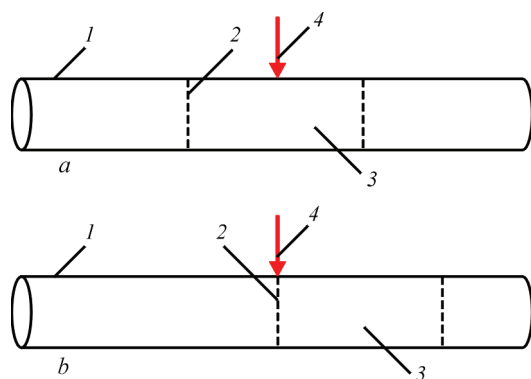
Schematic of two types of samples for conducting a dilatometric study: *a* — welded metal in the sample center (type I); *b* — fusion zone in the sample center (type II); 1 — cylindrical metal sample; 2 — fusion line; 3 — welded joint zone; 4 — contact points of dilatometer probes
